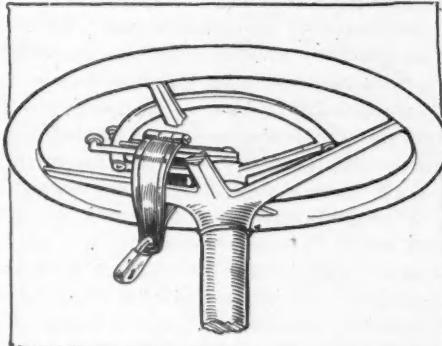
WILLIAMSON STEERING WHEEL LOCK
